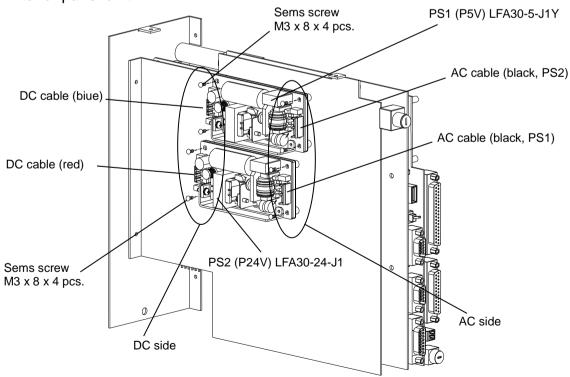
Side view of interior panel unit assembly (KSL3000)
